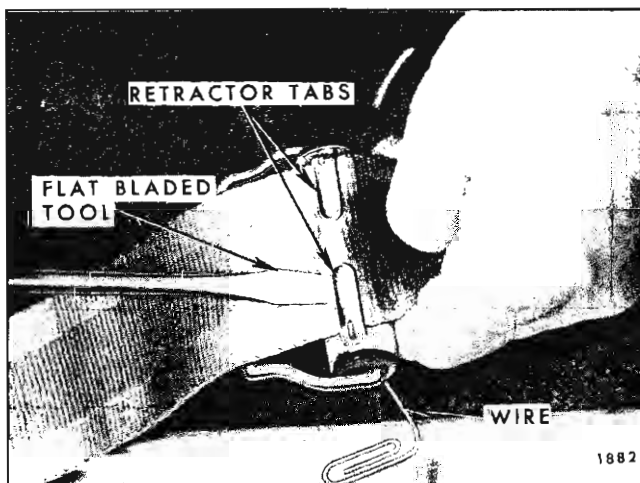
H46—Removal of Retractor from Seat Belt - 15000 - 16000 Series
